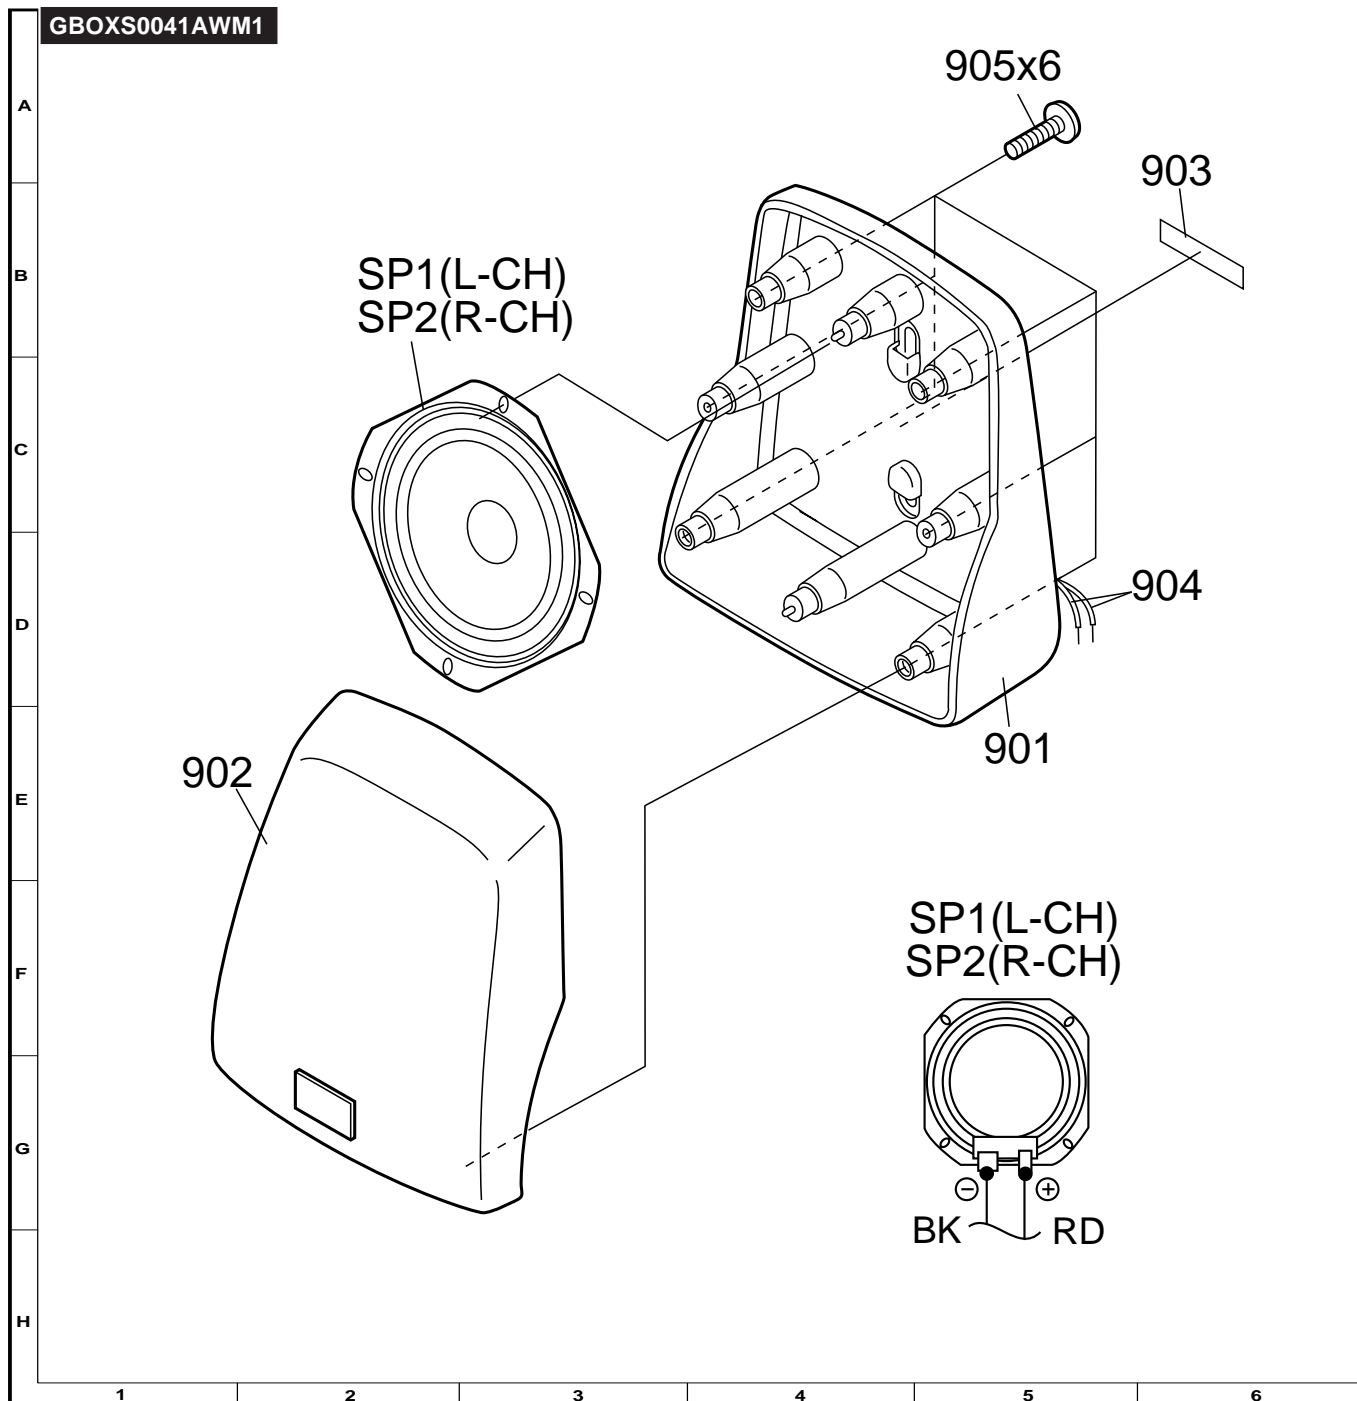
SPEAKER EXPLODED VIEW (3/3)
